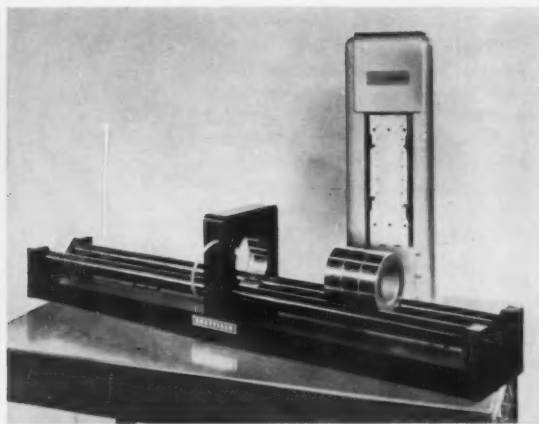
Machine control unit used on centerless grinder to gage bourrelet diameter of shells
